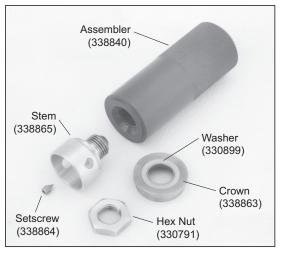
Crimp-Lock Titanium-aluminum Cap Parts and Assembling Tool
